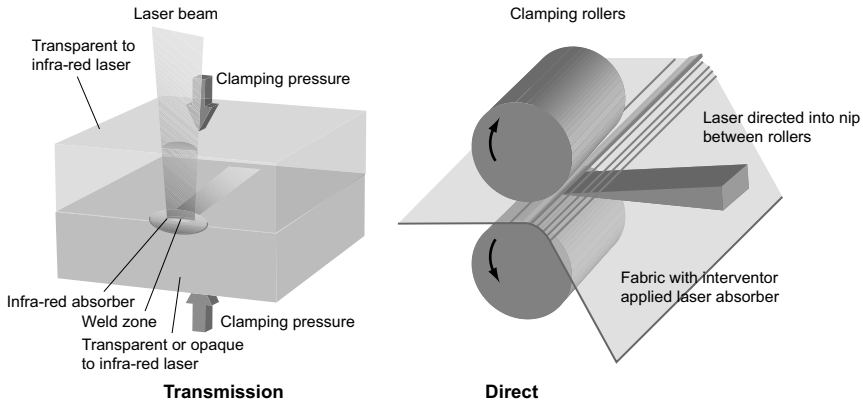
Transmission or direct laser welding configurations
